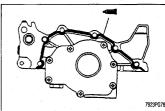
Apply sealant to the rear of the oil pump case—3.5L engine
